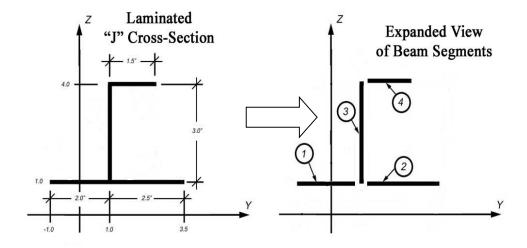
Expanded View of Beam Cross-Section Segments
